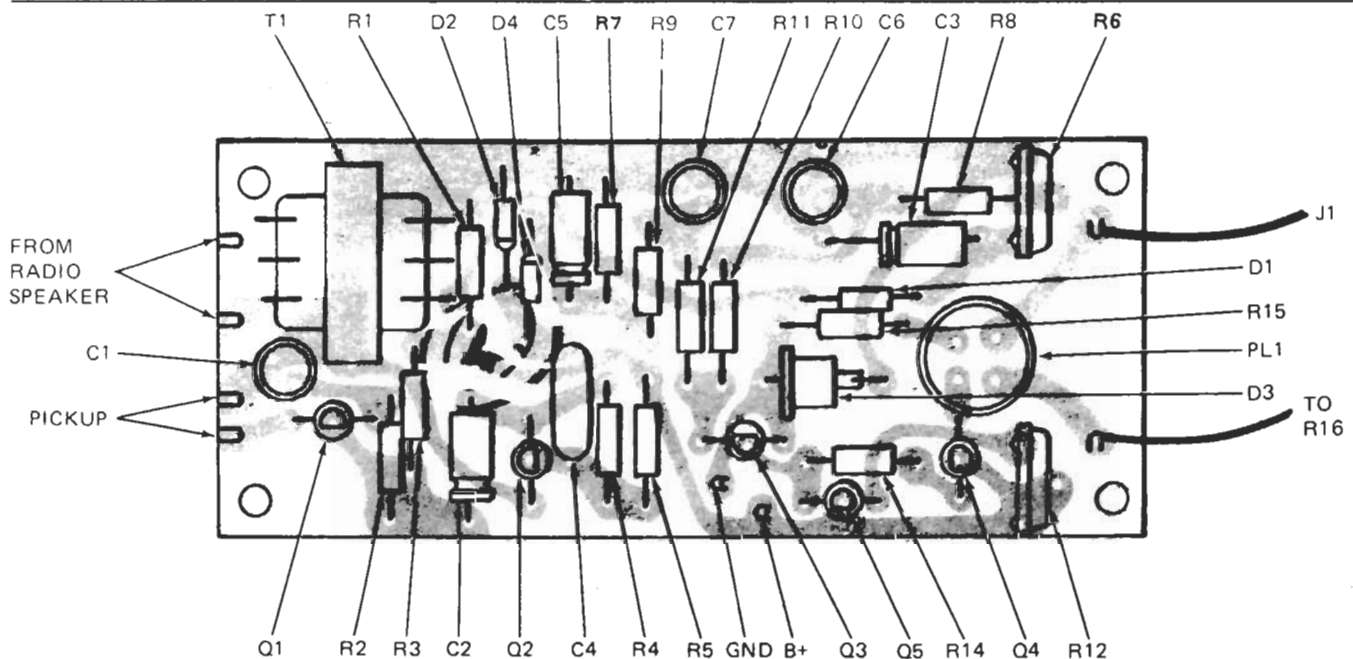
TOP SIDE OF THE PC BOARD. Parts placements is clearly shown.
